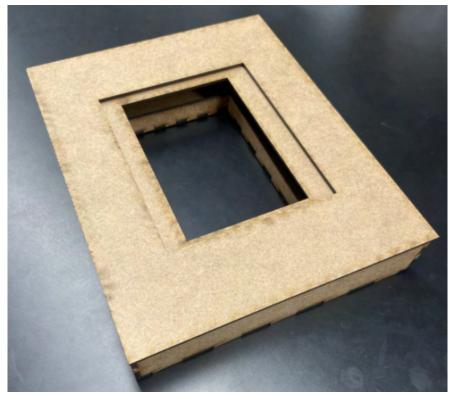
Photo of the laser cut HDF prototype with all the pieces assembled together.
